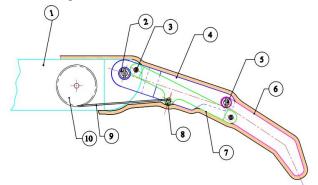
Assembly drawing of the middle finger with its across four-link mechanism
